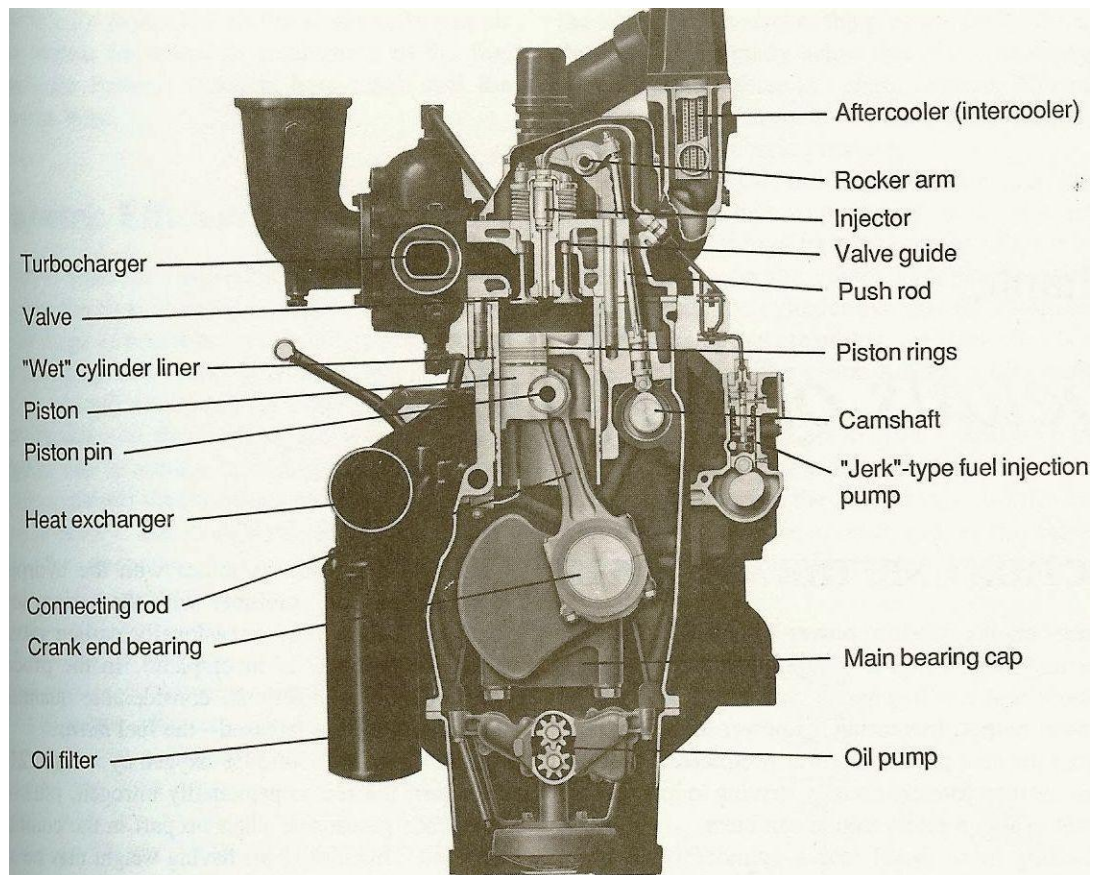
Diesel Engine diagram (Courtesy Marine Engine)
